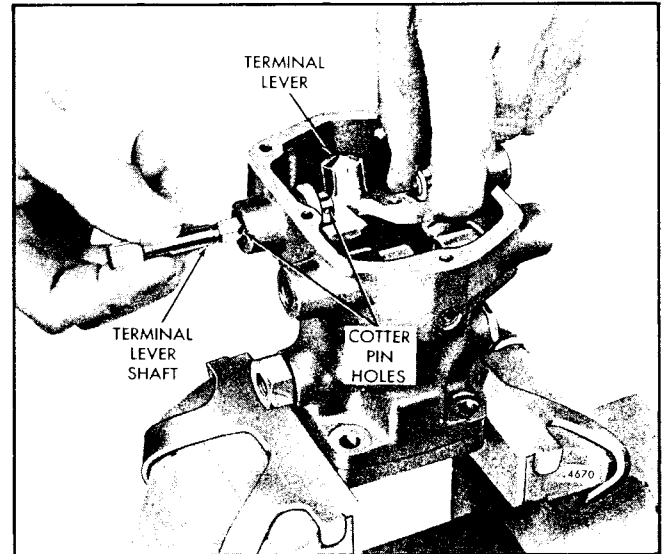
Installing Terminal Lever Shaft in Governor Housing and Terminal Lever
